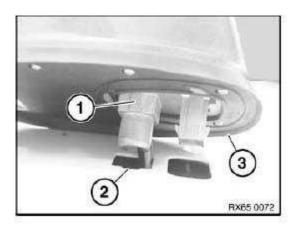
Roof Opening, Guide And Seal Courtesy of BMW OF NORTH AMERICA, INC.
